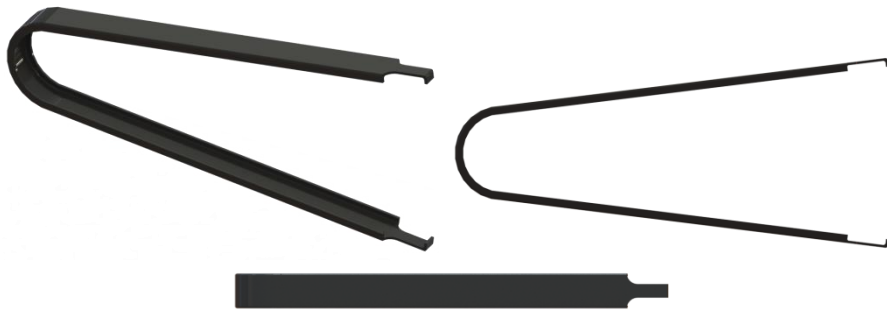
Pushbutton Extraction Tool (P/N 15193)
